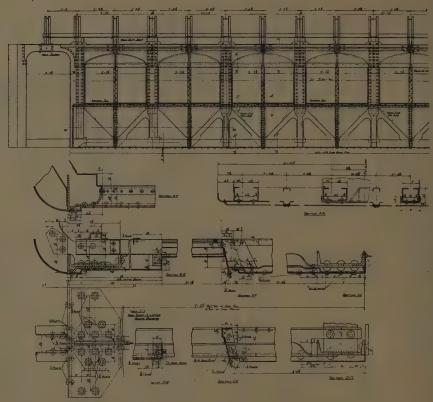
Section of bodyside, all-steel carriages, Erie Railroad.
